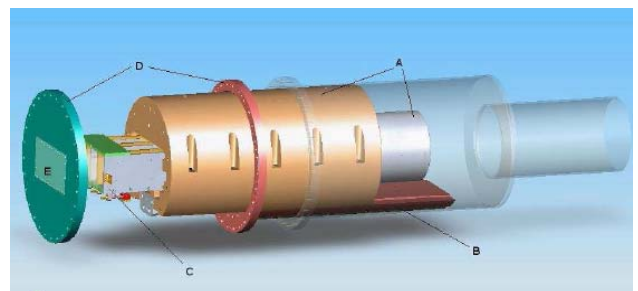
The exploded view of the in-pile plug assembly (A: Plug, B: Base Table, C: Cassette, D: Blind Flange & Ring Flange, E : Window Flange)
